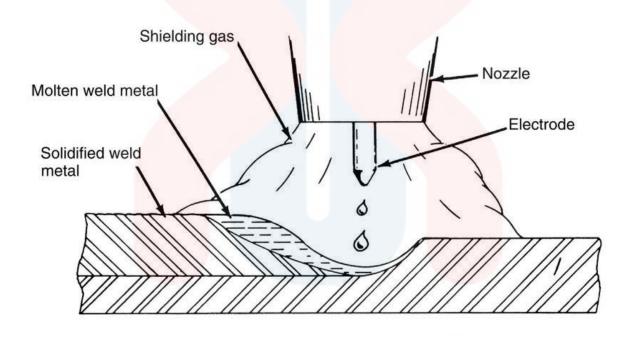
MIG welding process (Antonini, J. M. 2014)
